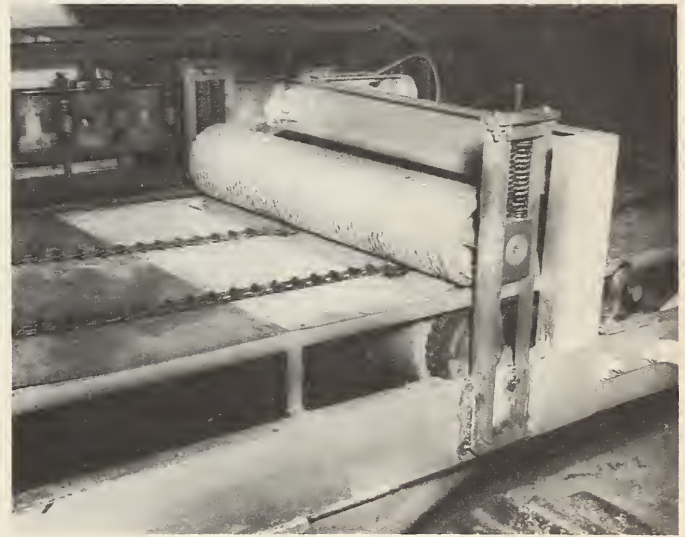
A rope-wound crushing roller set in the feed table and operating against a three-sectioned steel roller below.
